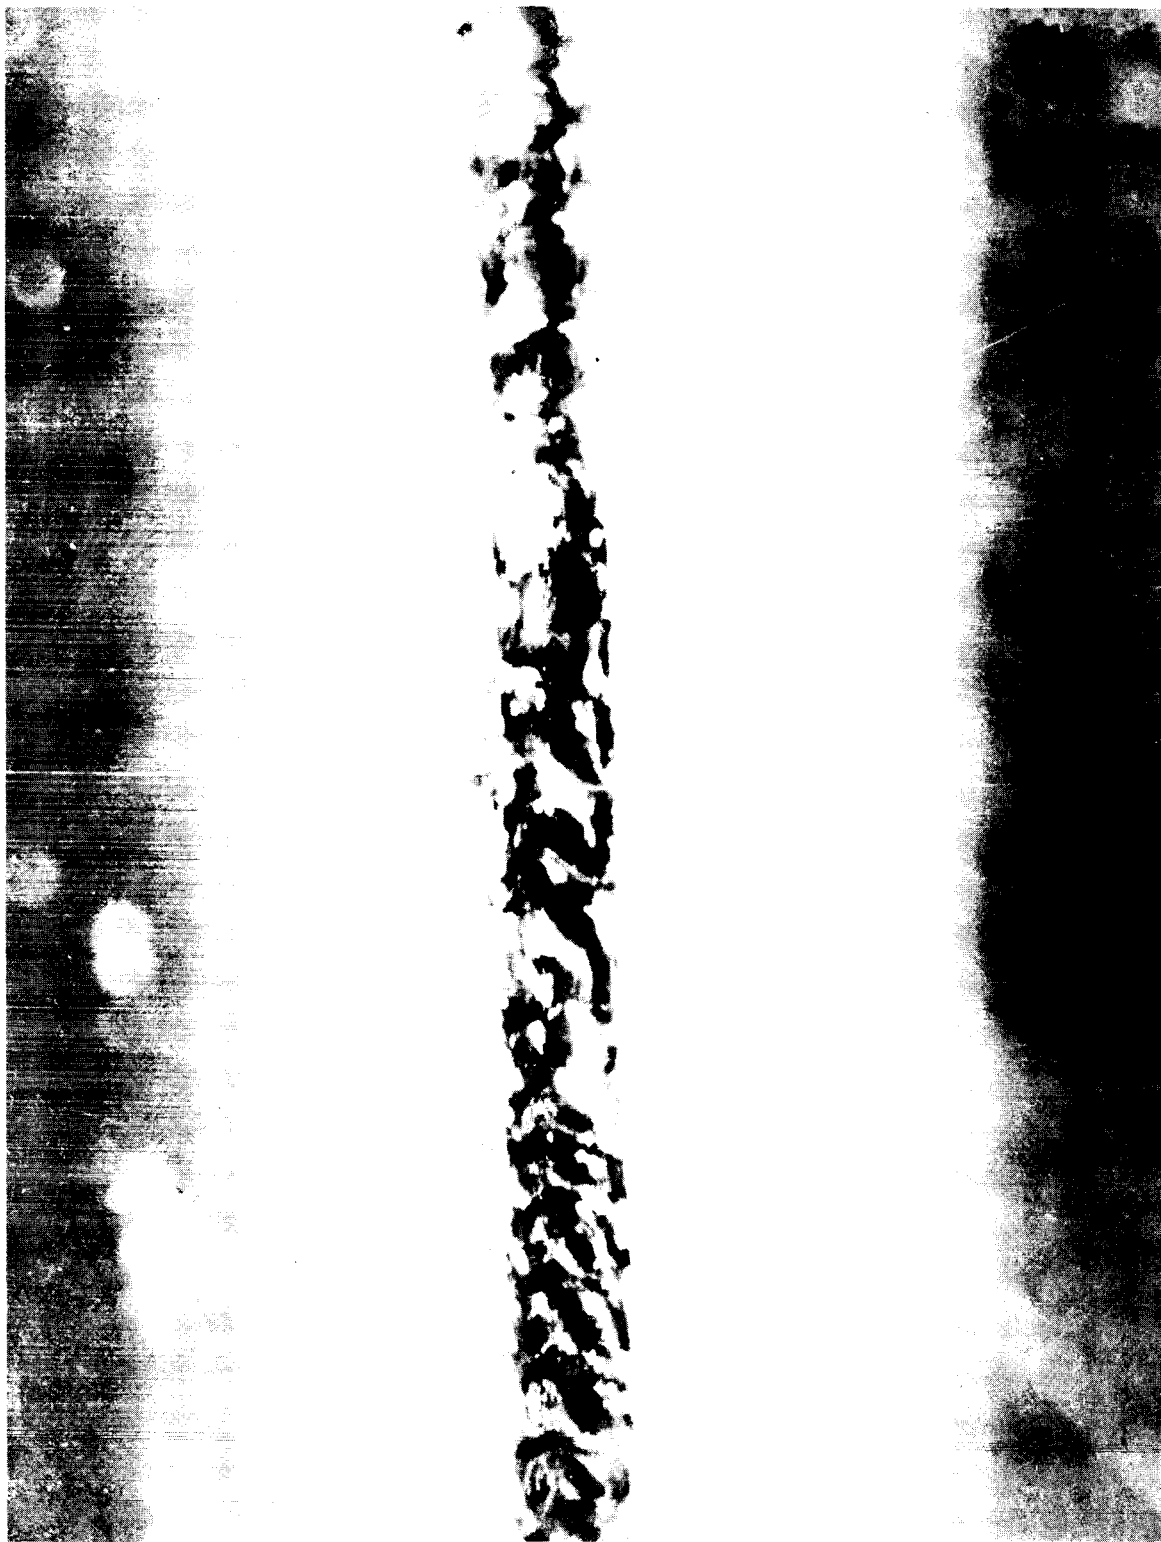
ONE AND TWO PASS LASER WELD IN 0.008 INCH
